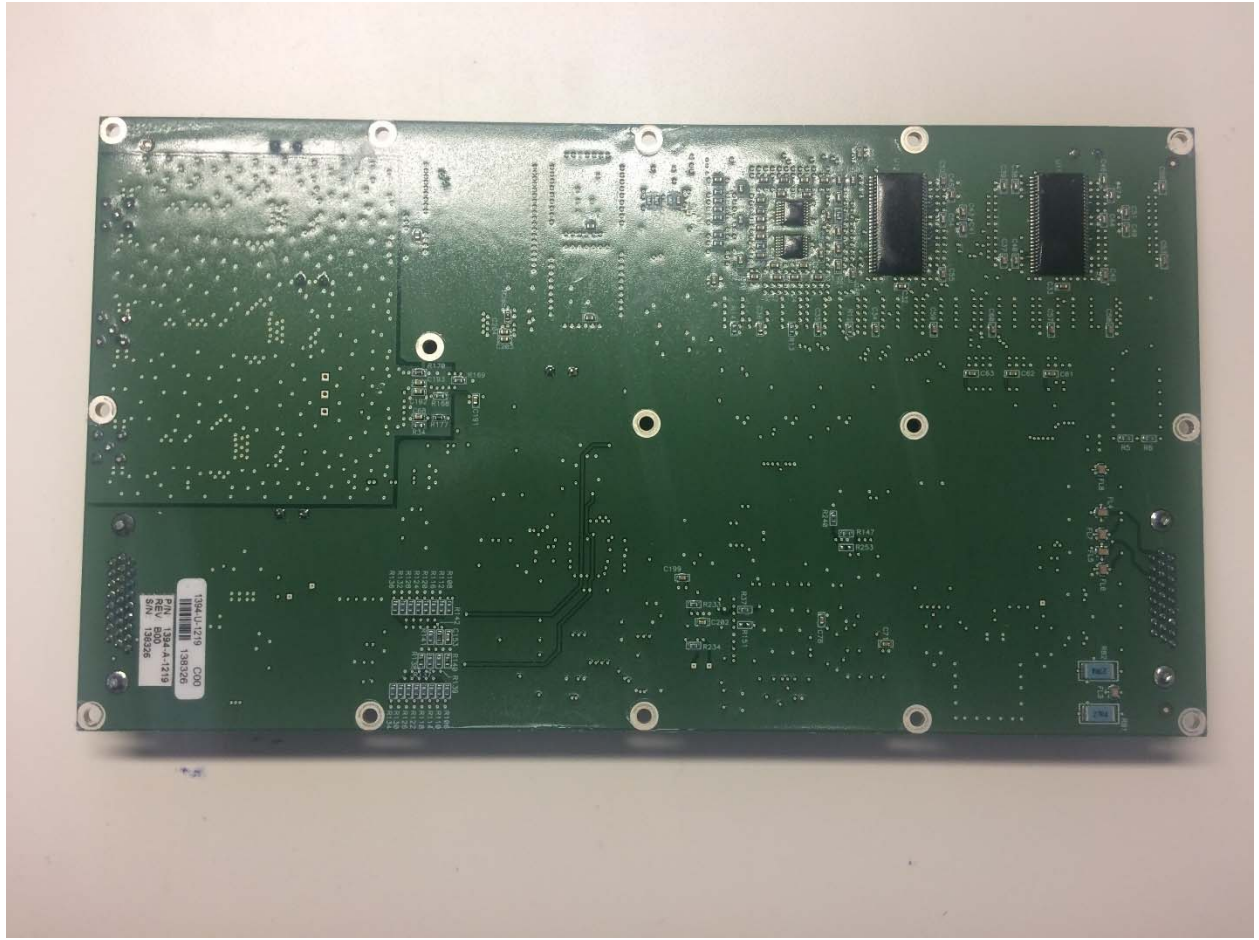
1394-A-1219\_B00 CCA FMPA Bottom View
